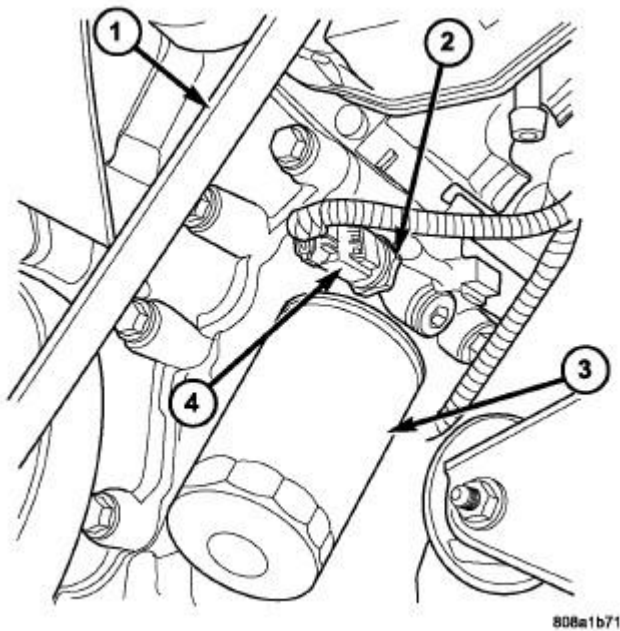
Belt, Oil Pressure Sensor, Oil Filter & Connector
